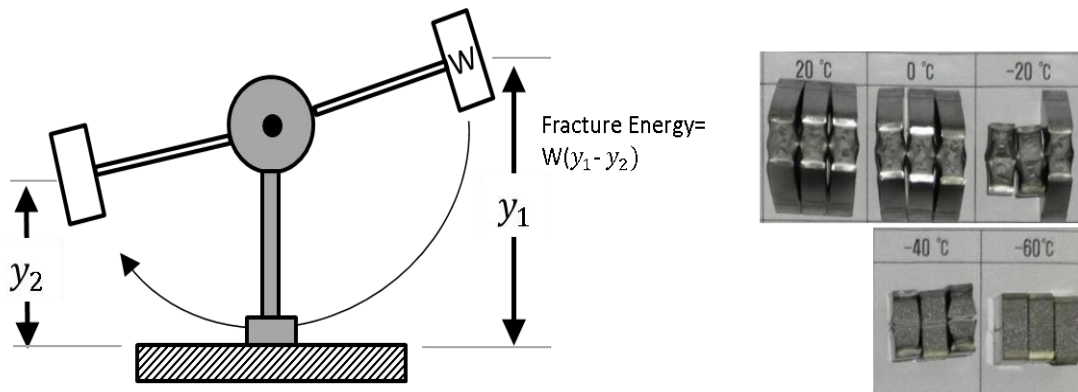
The Charpy test set up diagram (Left), fractured specimens (Right)
